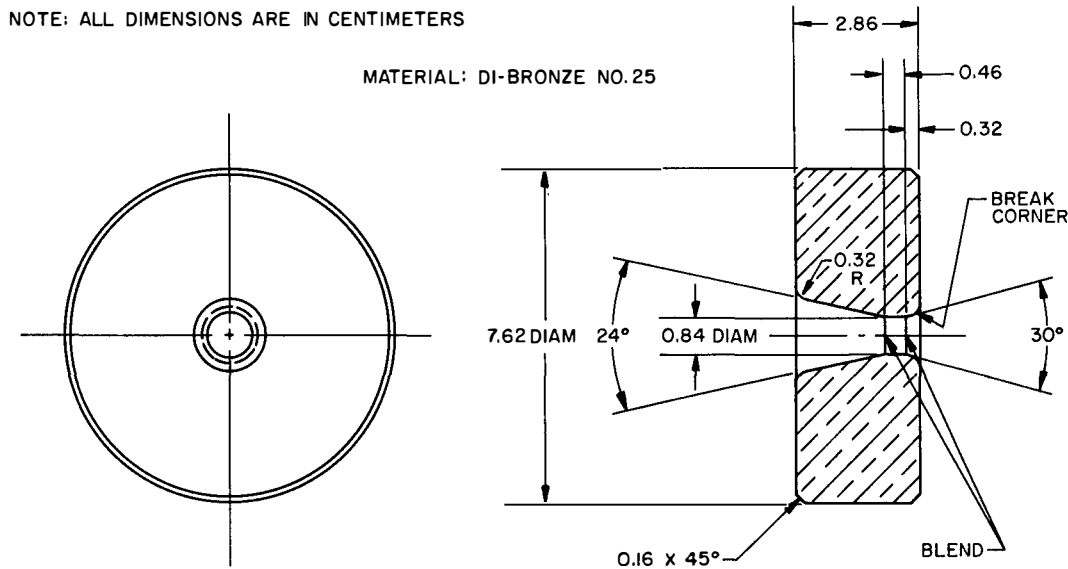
Typical Die Design for Ductile-core Drawing of V-20w/oTi Tubing
